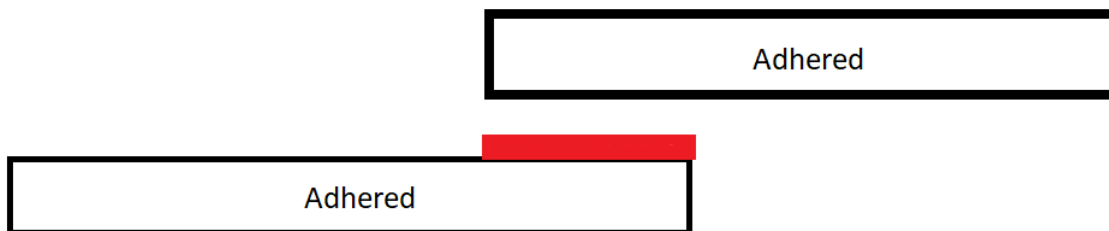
Adhesive Failure of Bonded Lap Joint.
